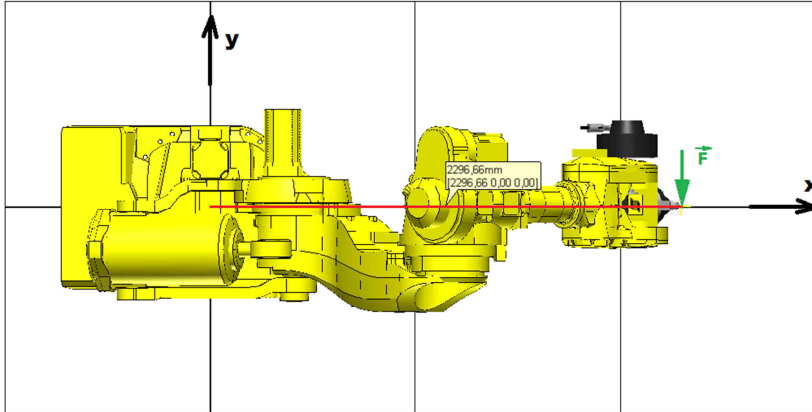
Robot configuration for identifying the spring constant at the first robot axis
